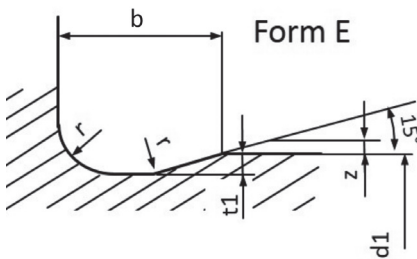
Recommended discharge size "R" in Fig. 3.7 referring to DIN 509 typology E
